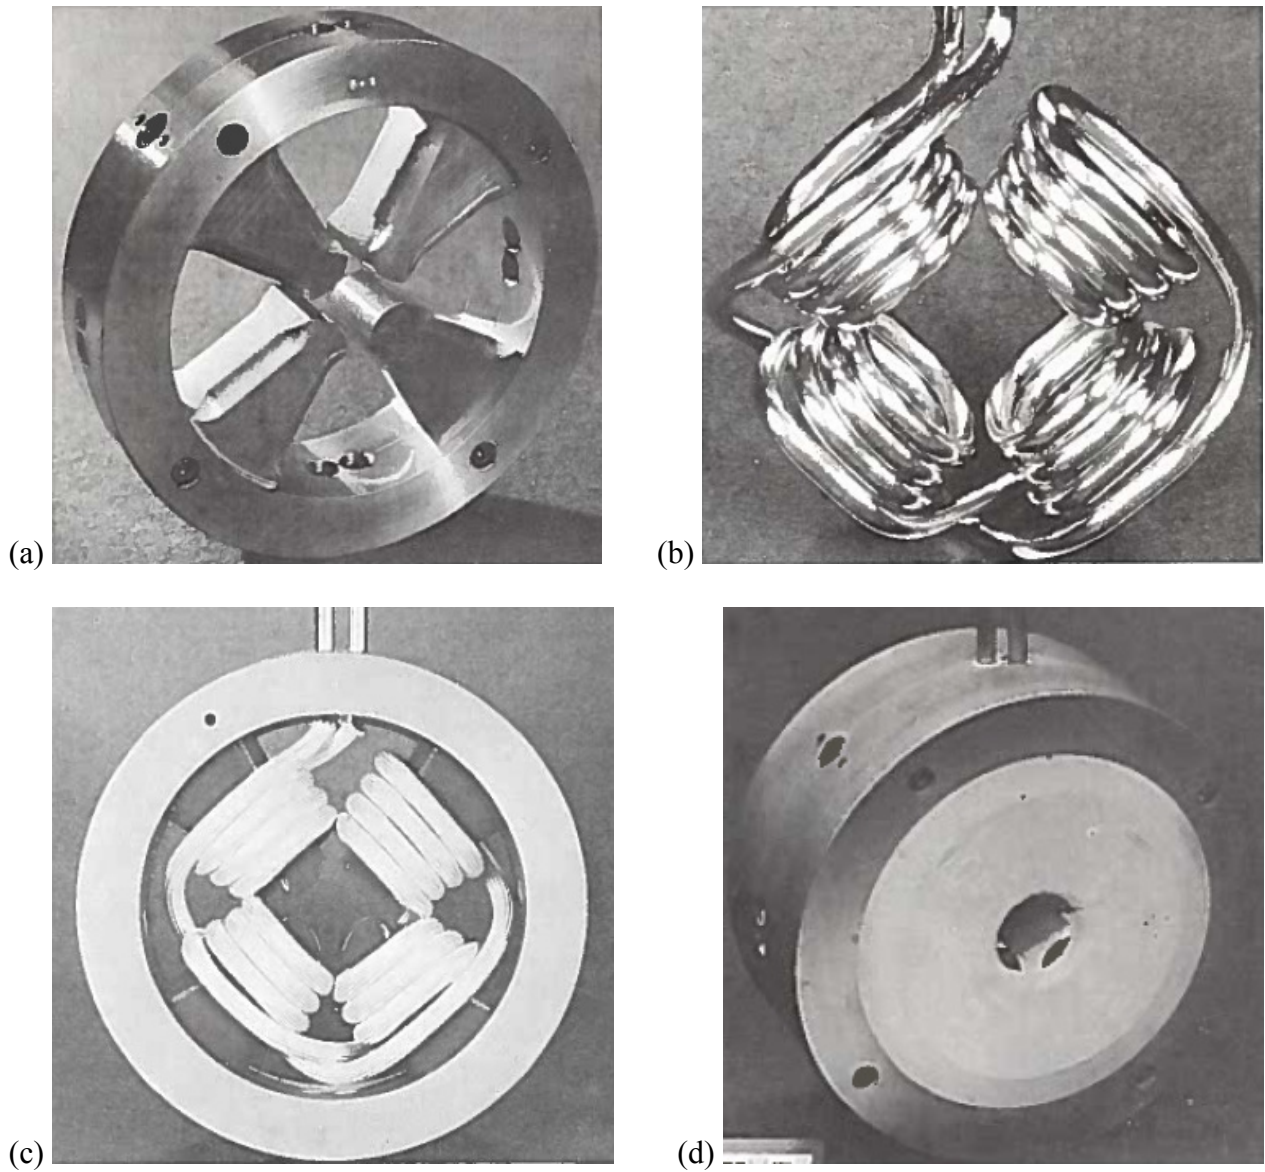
DTL quadrupole details: (a) yoke and pole pieces; (b) current coil; (c) coil assembled with iron; (d) quadrupole fully assembled.
